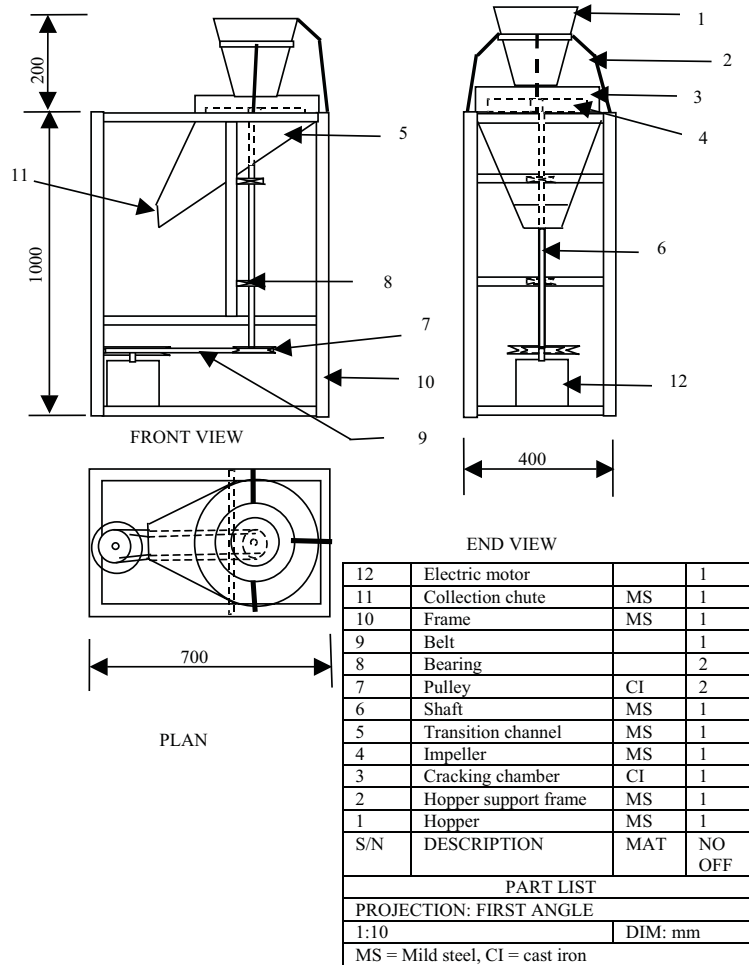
Orthographic drawing and parts list of the centrifugal impaction device.
